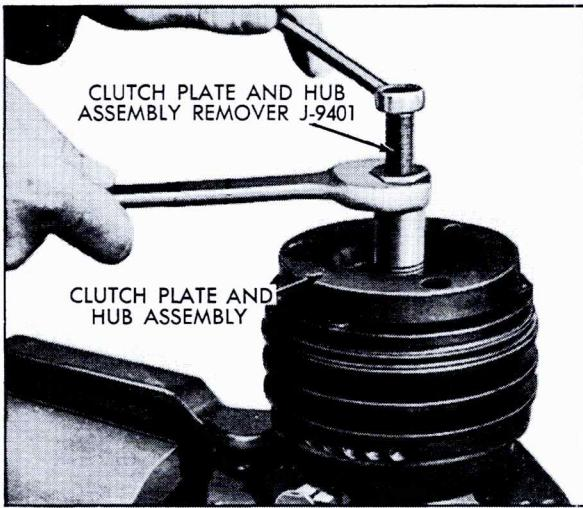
Removing Clutch Plate and Hub Assembly
